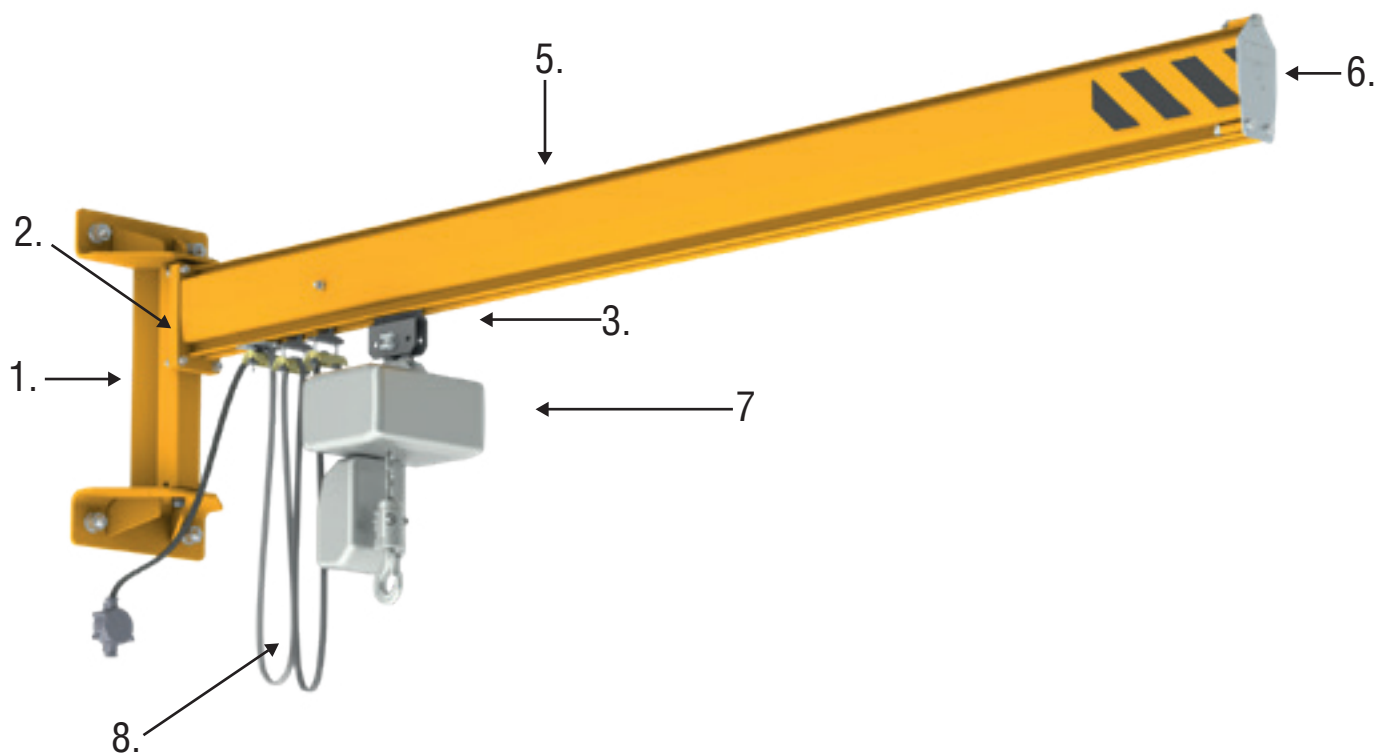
Wall-mounted jib crane for low headroom applications, steel
